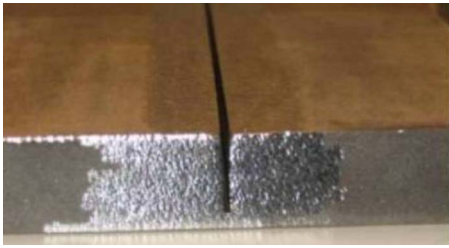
1.5 mm groove machined down the center/middle of the plate
